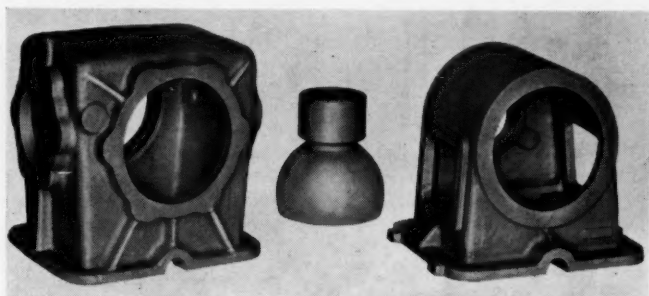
CASTINGS OF MATERIAL SIMILAR TO FIG. 6. TRANSMISSION AND JOINT PARTS FOR TANDEM DRIVE FOR MOTOR TRUCK. WHITE AS-CAST, HEAT-TREATED FOR SPHEROIDIZED STRUCTURE.
